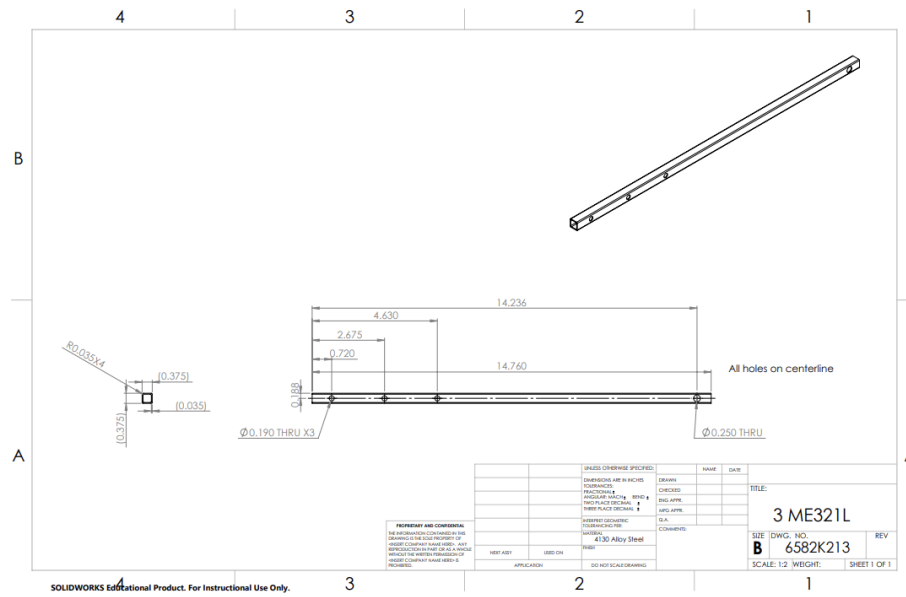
CAD fabrication drawing of the steel arms. All dimensions in mm.
